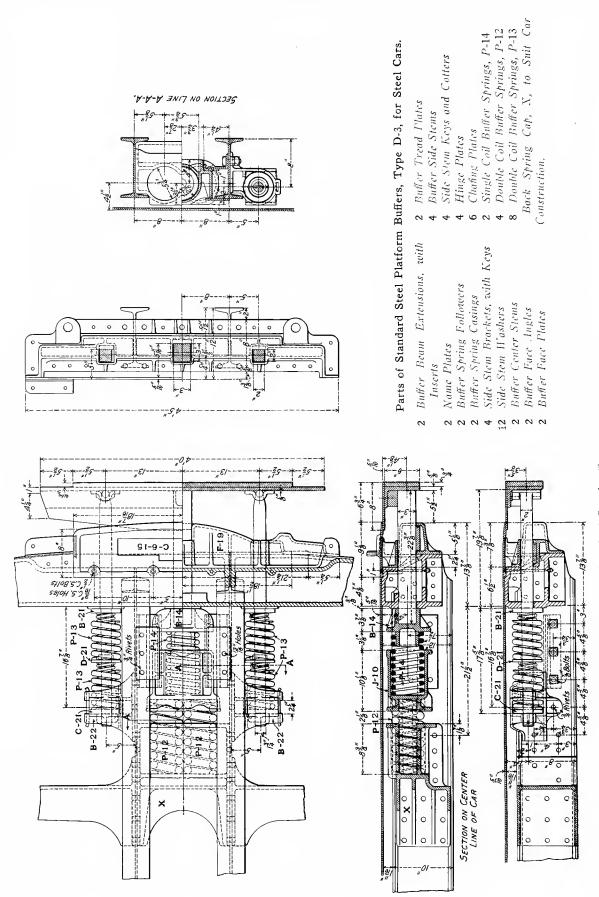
Standard Steel Platform Buffers for Steel Cars. Standard Coupler Company.
